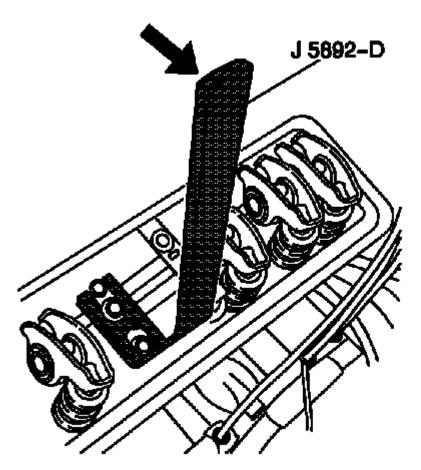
View Of J 5892-D, Valve Rocker Arm Bolt & Washer Courtesy of GENERAL MOTORS CORP.
